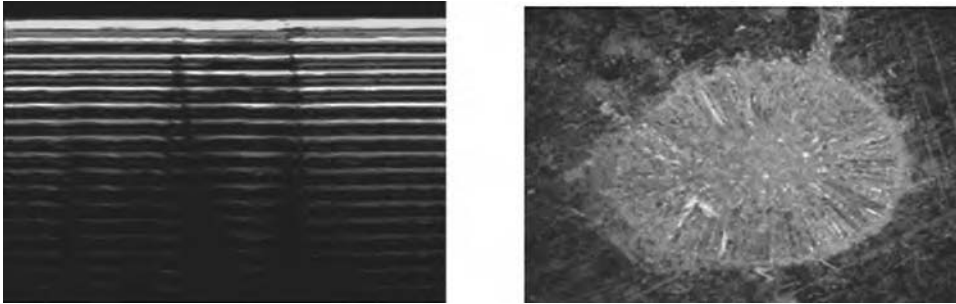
B-scan and faying surface of a cold weld. Current = 5500 A
